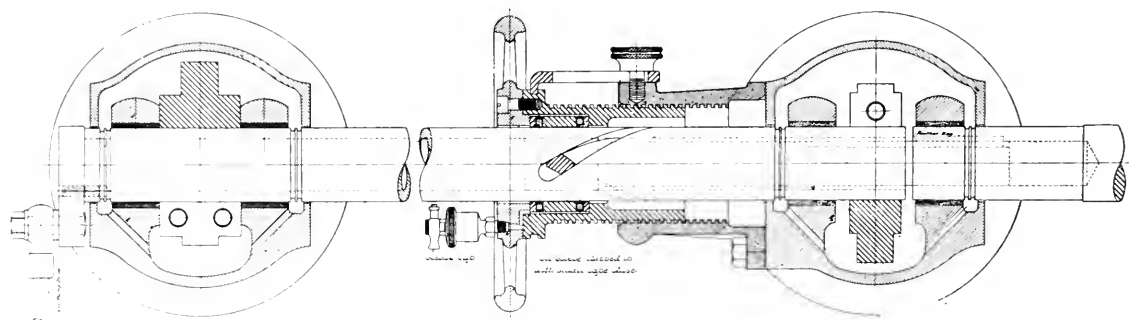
VALVE GEAR FOR AUXILIARY EXHAUST VALVES
